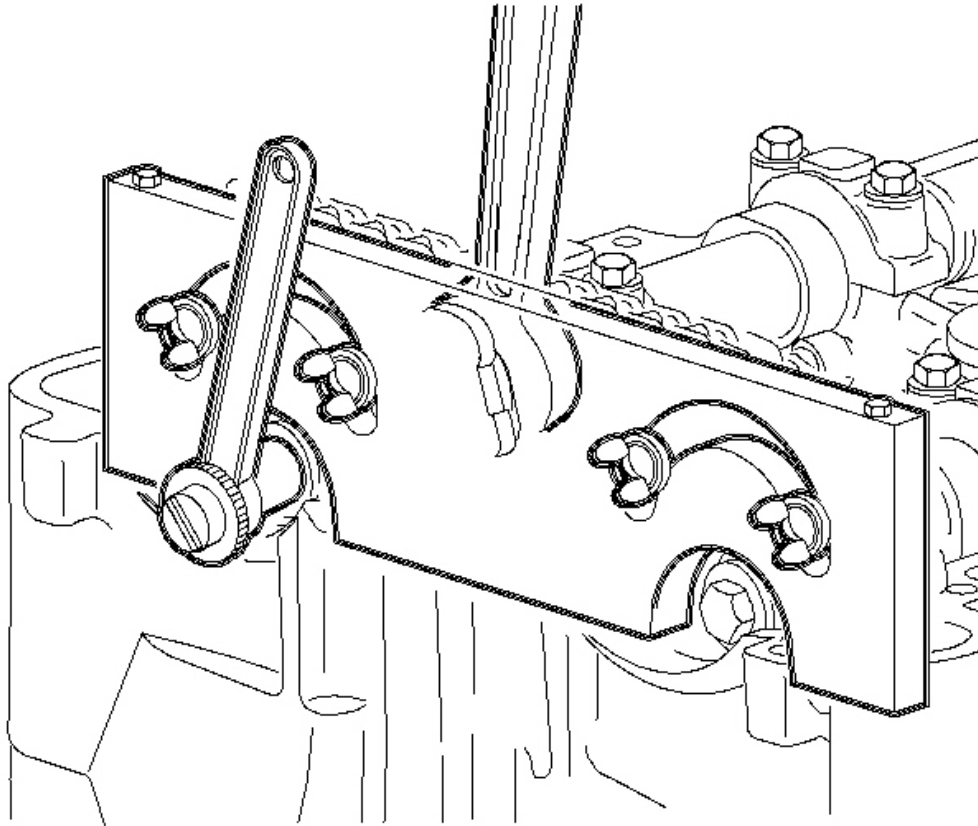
Holding Camshaft In Place Using A 24 mm Open End Wrench
